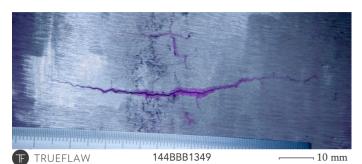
PENETRANT IMAGES OF PRODUCED CRACKS (30 mm TARGET DEPTH).
